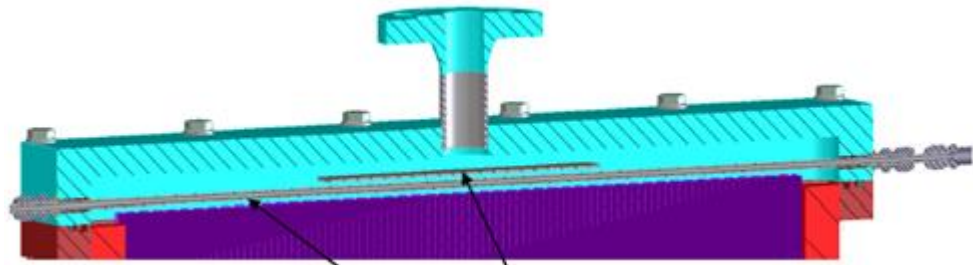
Rectifier header with fluid distribution tube and breaker plate.
